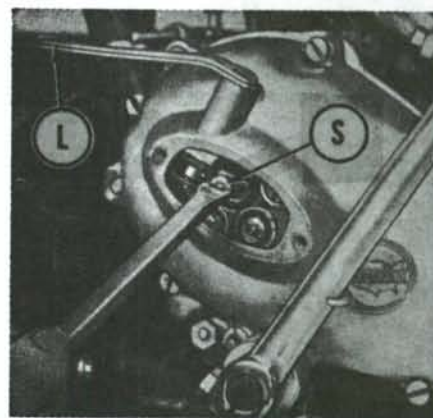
Clutch is adjusted at screw (S). Refer to text.
